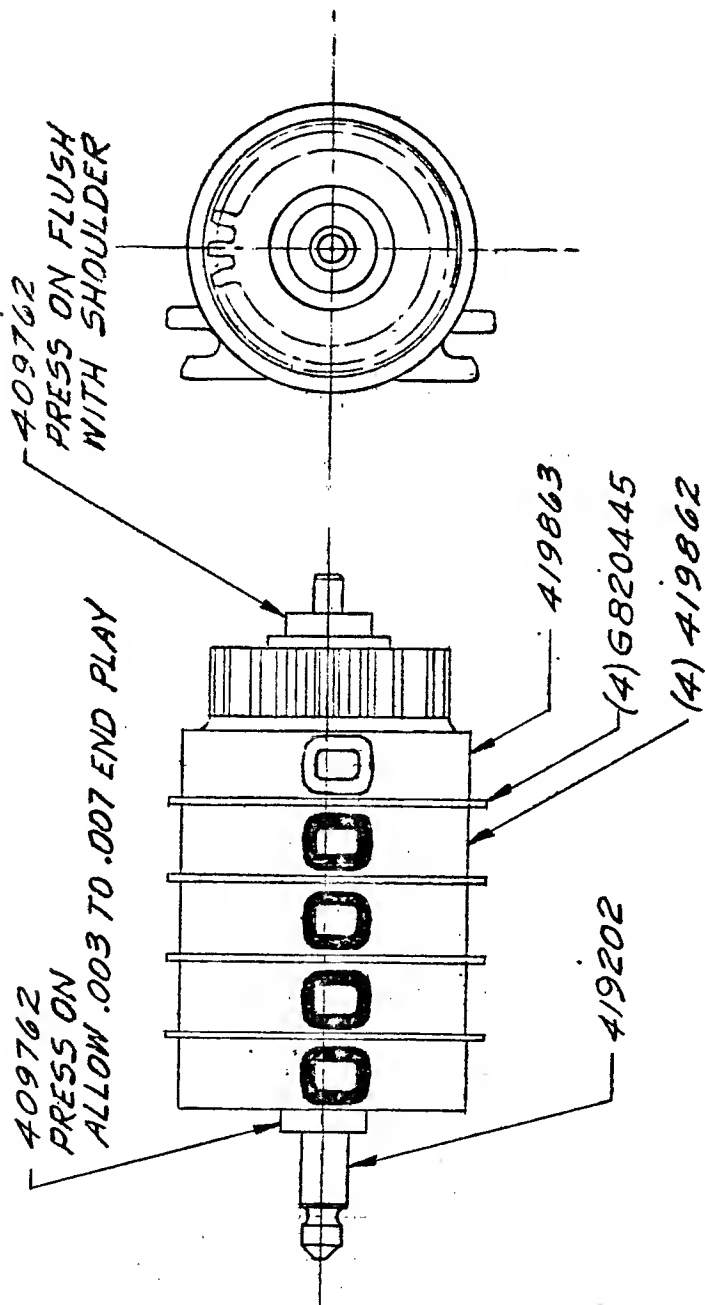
ODOMETER ASSEMBLY DRAWING
